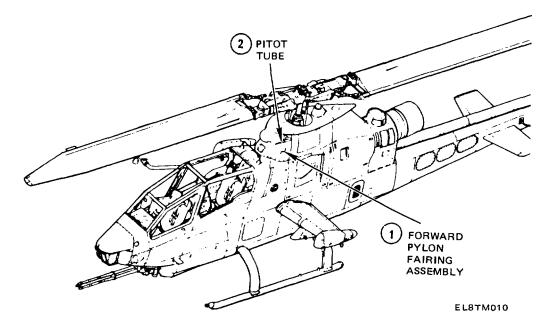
Receiver and Electronics Assembly Access Locations.
